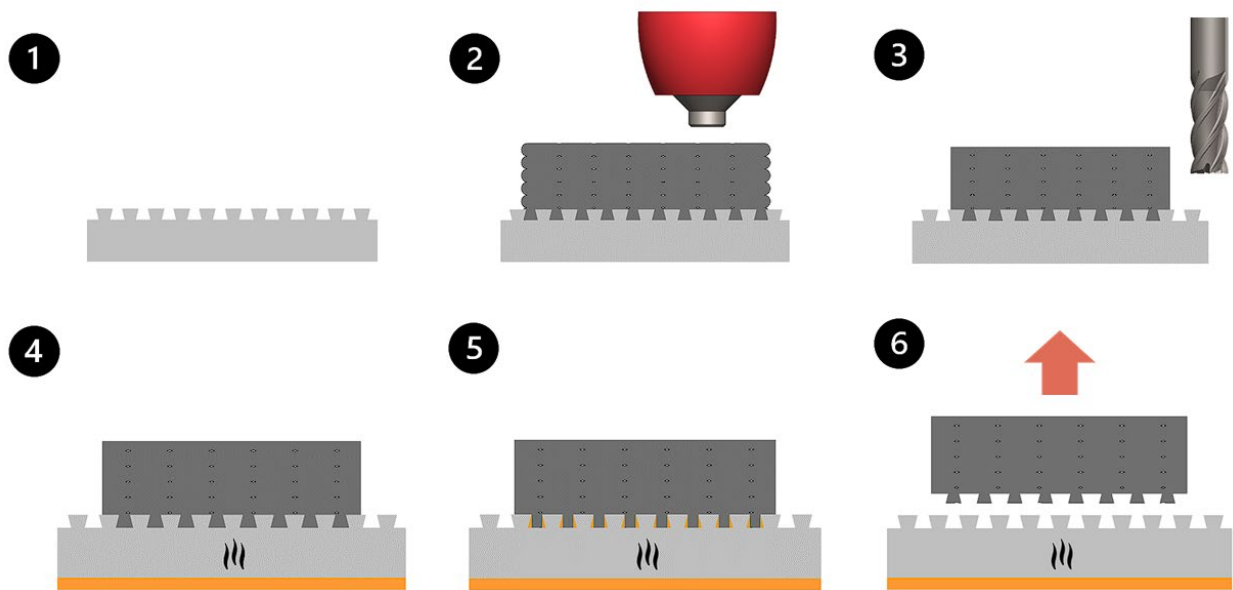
Process steps for producing and removing a part on the interlocking print bed.
